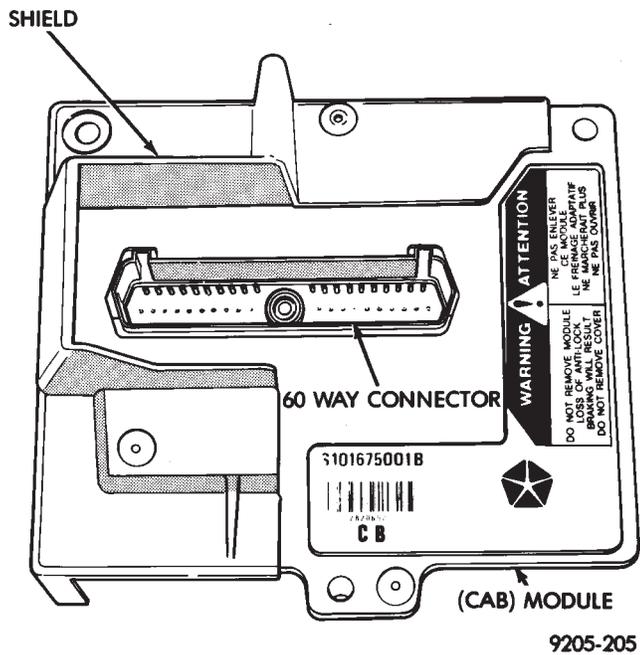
(CAB) Controller Anti-Lock Brake Module
